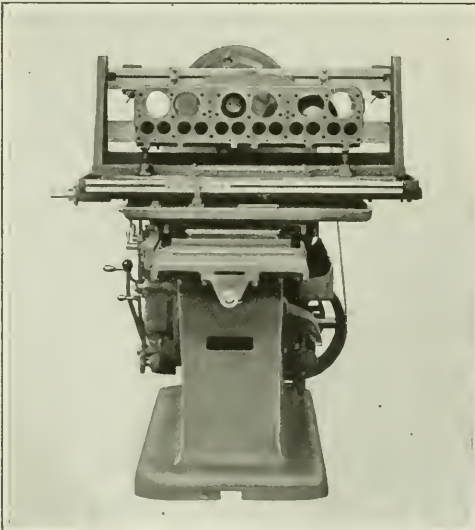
End View of Head Grinding Machine showing the Manner of setting up a Cylinder Block
